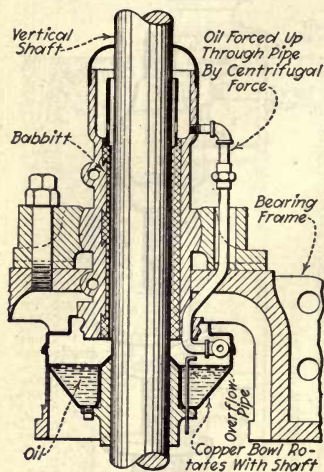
Guide Bearing For Vertical Shaft Centrifugal Pumps. (Worthington Pump And Machinery Corp.)
